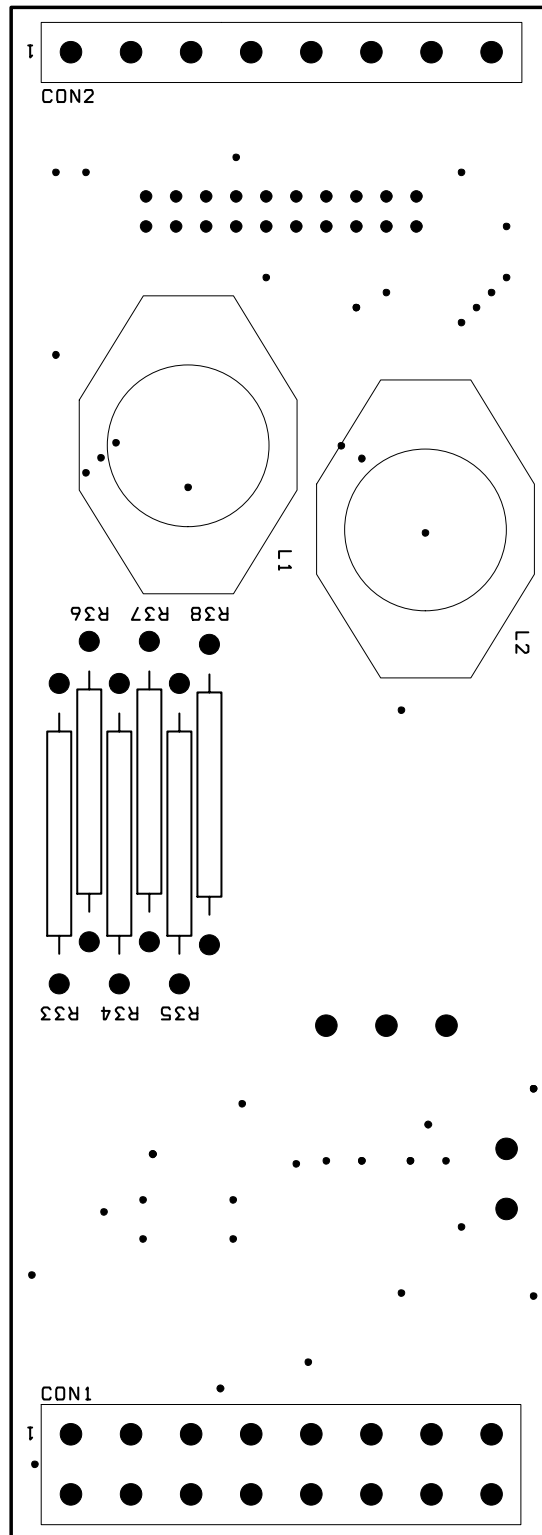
S/T Port Line Interface Subassembly with Coding Plug board (bottom side inscription)
